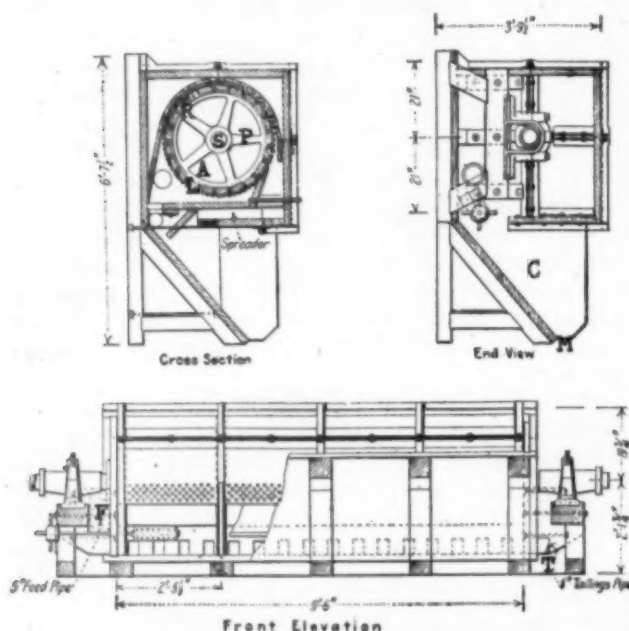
DETAILS OF THE FLOTATION MACHINE AT THE BURRO MOUNTAIN MILL
